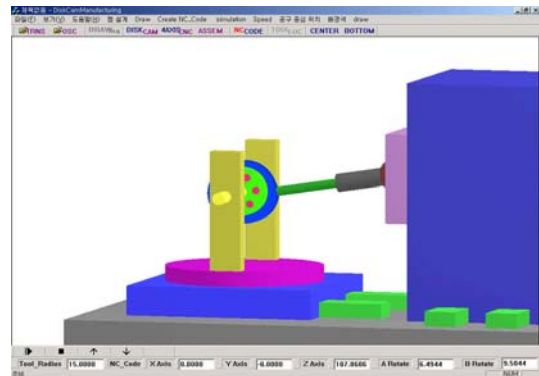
Integral simulation for assembled process in a 5-axis CNC machine center
